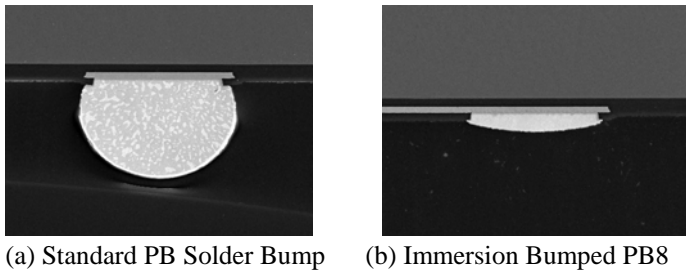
Comparison of Standard PB8 Solder Bump and an Immersion Solder Bump.
